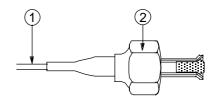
Style 45A (incl. valve depressor mounted into flare)
